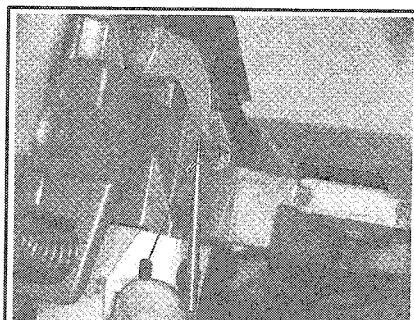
Using a small pointed tool, a seal pick works just fine, disengage the loop for the PRNDL indicator from the stud
